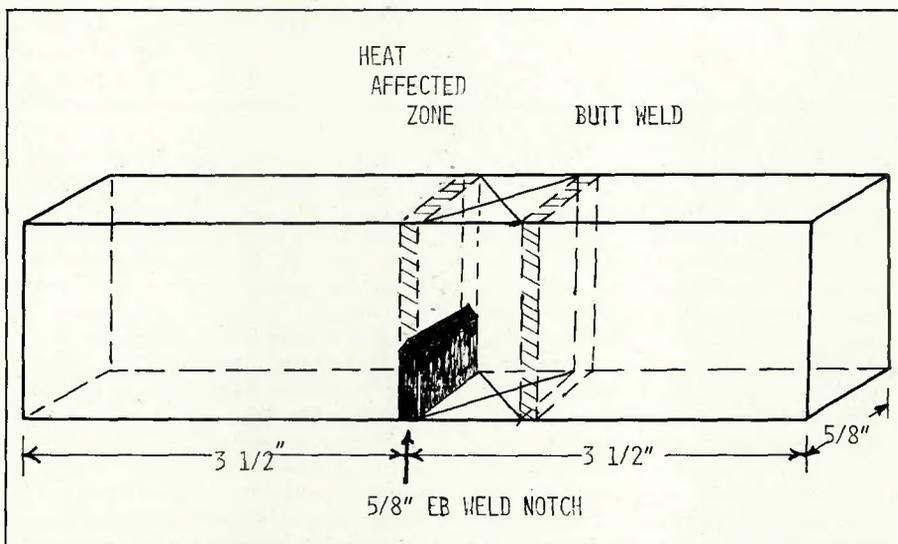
Schematic of DT specimen and notch placement. Welds to produce the HAZ for fracture travel were made at 85kJ/in.
